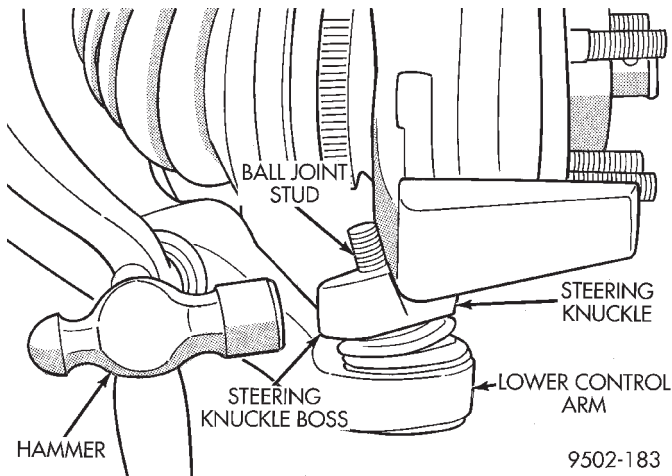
Separating Ball Joint Stud From Steering Knuckle
